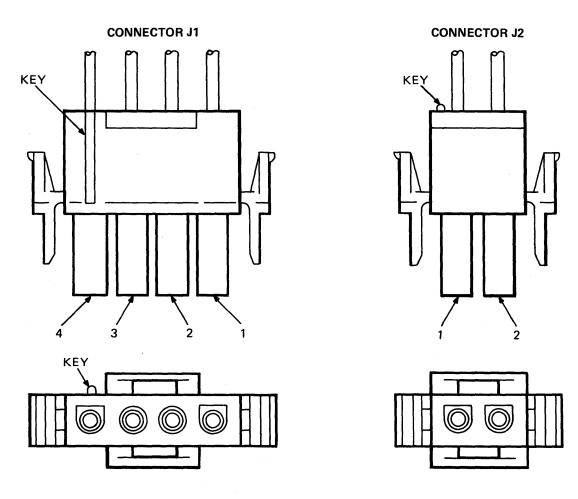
Rear Panel Assembly, ac Cable Pin Locations
